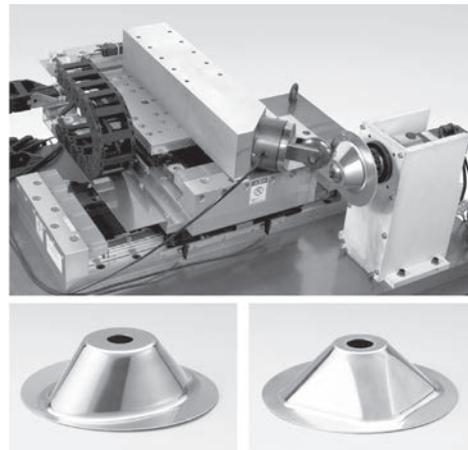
Linear motor driven spinning machine (experimental) and product samples
